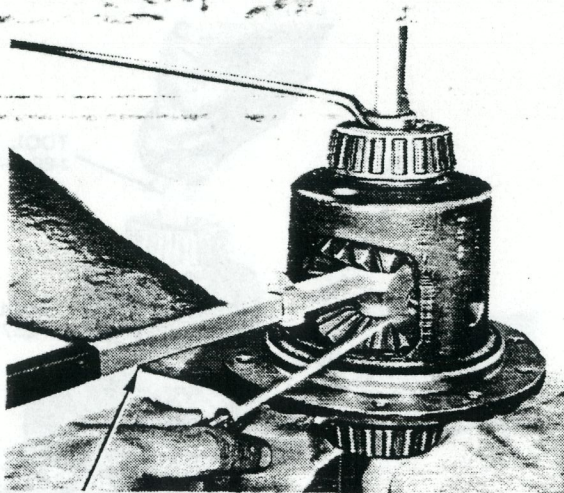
F-75 Pinion Gear Thrust Washer Installation
